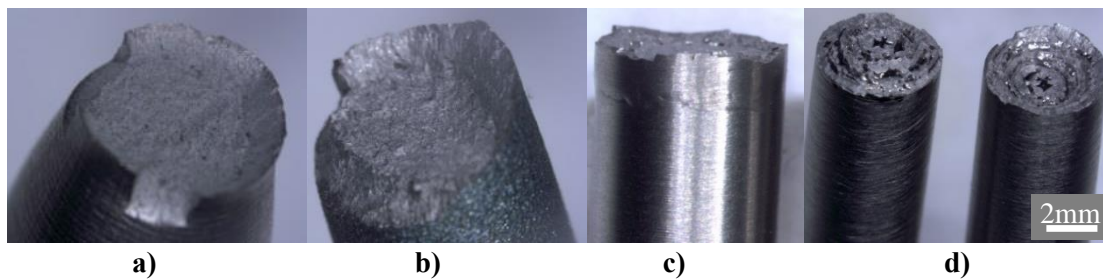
Images (stereo-microscope) of typical fractured surface of tensile test specimens (a) machined, b) additively manufactured, c) W1 welded, d) W2 welded
